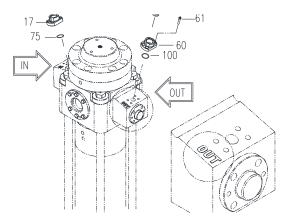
Port [IN] and [OUT] Marked On Valve Housing
